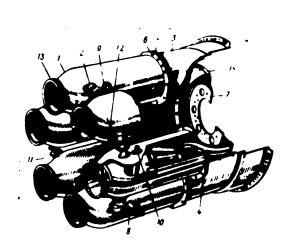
Combustion Chamber and Diaphragm Assembly
